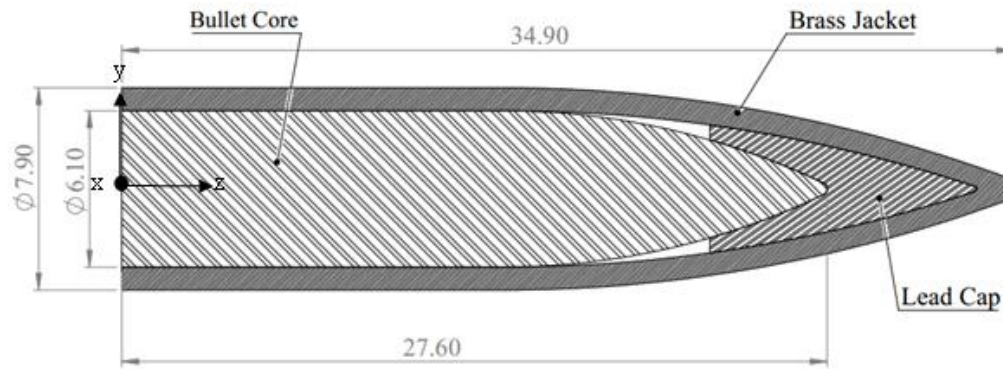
7.62 mm AP Bullet Assembly and Dimensions
